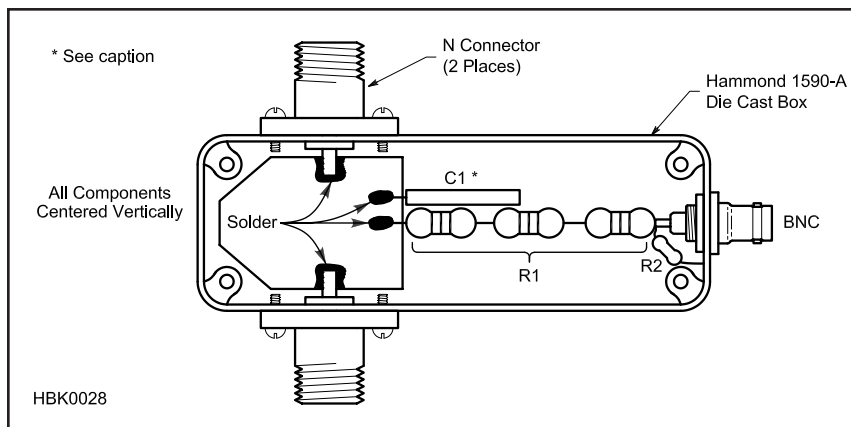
Drawing of the 40-dB power tap assembly shown schematically in Fig 19.95. The center conductors of the two N connectors (RF INPUT and RF OUTPUT) are connected by a 1 × 1.5-inch piece of sheet brass with its corners removed to clear the pillars in the Hammond 1590A die-cast aluminum enclosure. C1 is made from a piece of #22 AWG insulated hook-up wire; it extends 0.6 inch beyond the edge of the tinned metal piece and almost rests against the two resistor bodies.
